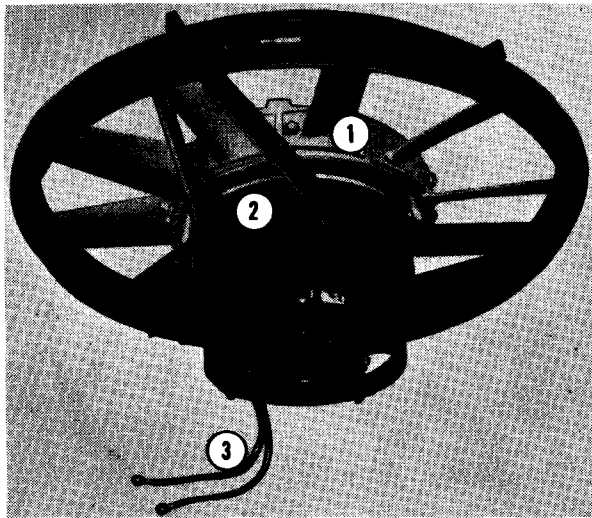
Previous Design Grid Fan And Motor Assembly - 1.22 m (48'') Fan
